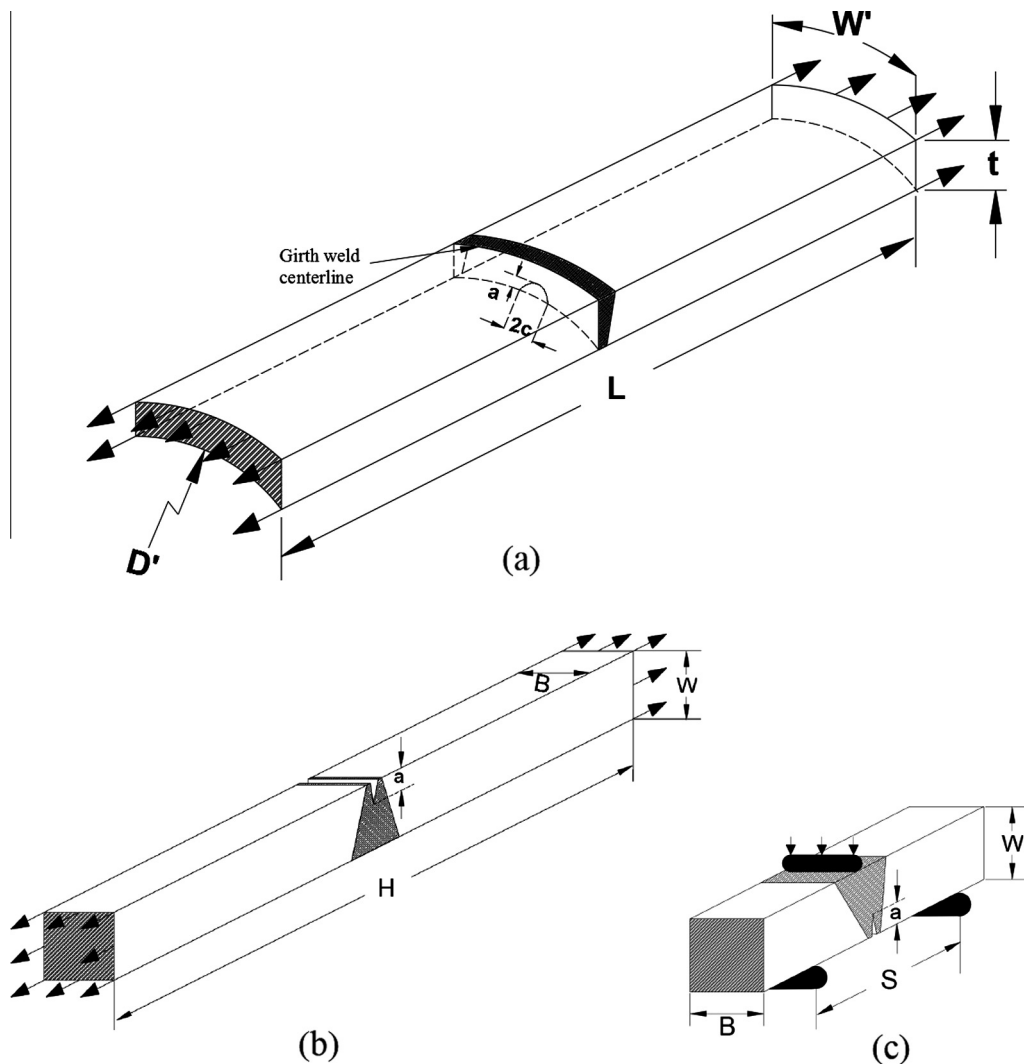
Main dimensions of fracture specimens; (a) Medium Curved Wide Plate; (b) clamped SE(T) specimen; (c) 3 point bend SE(B) specimen.
